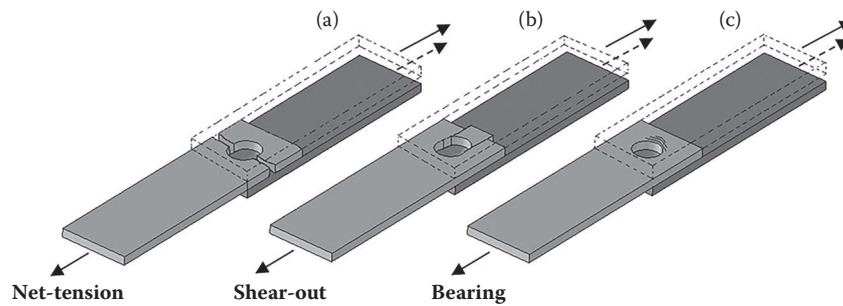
Failure modes of fastener joints in composite plates: (a) net tension; (b) shear-out; (c) bearing failure^[11,41,47]
